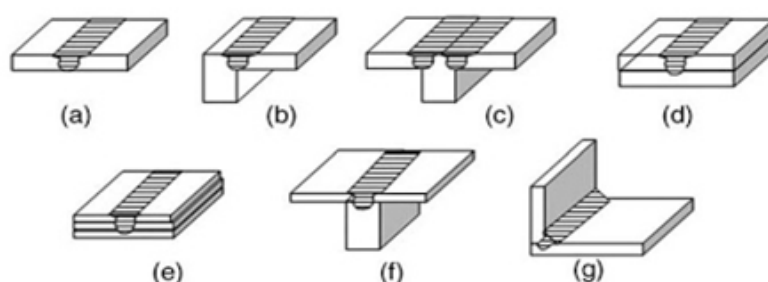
FSW joint configurations (a) square butt joint, (b) edge joint, (c) T butt joint, (d) lap joint, (e) multiple lap joint, (f) T lap joint and (g) fillet joint [6]
